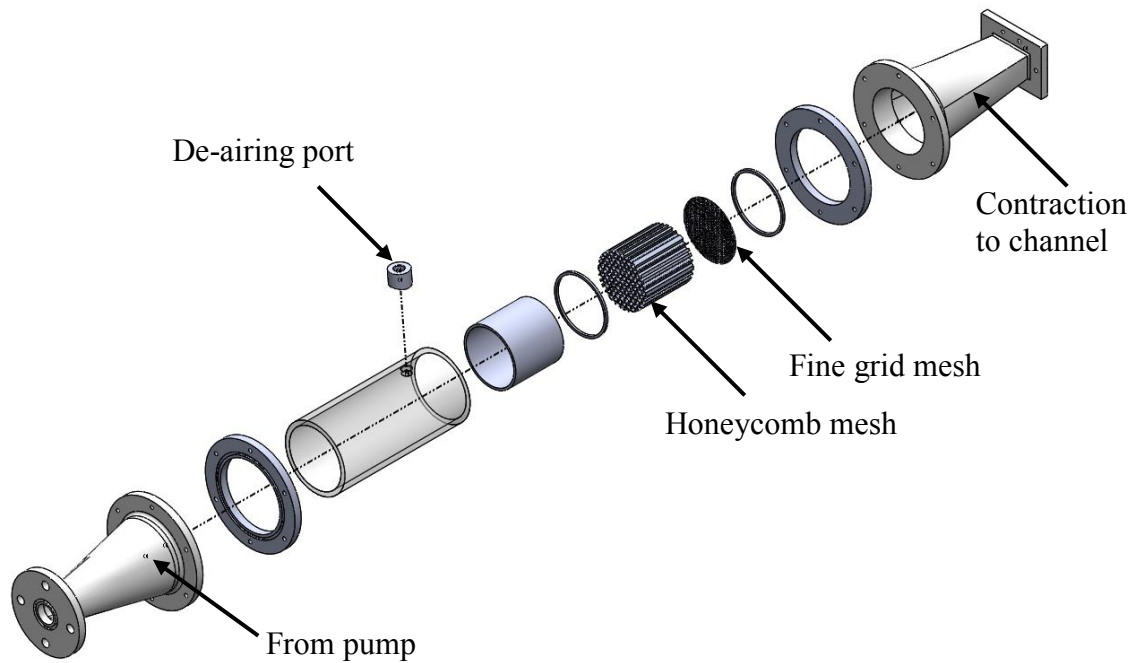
An exploded view of the upstream chamber used to remove large eddies.
